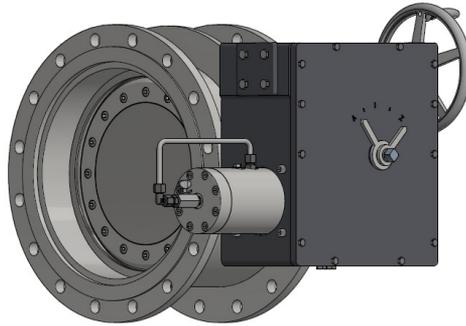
combined butterfly/check valve with a manual actuator using a handwheel
